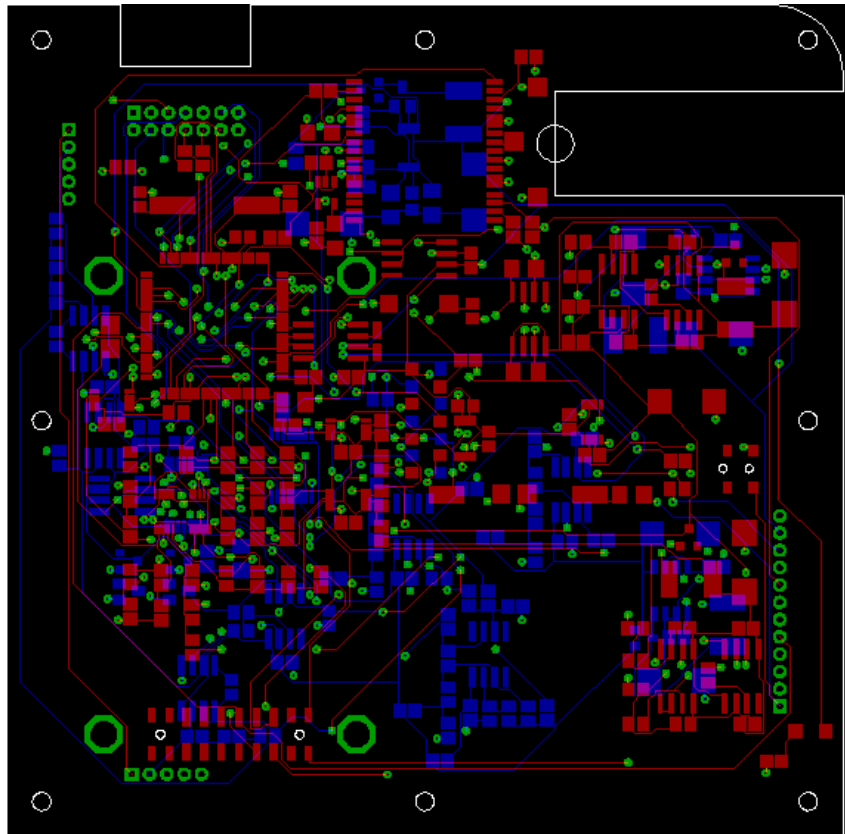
PCBSat Core PCB Top and Bottom Layers
